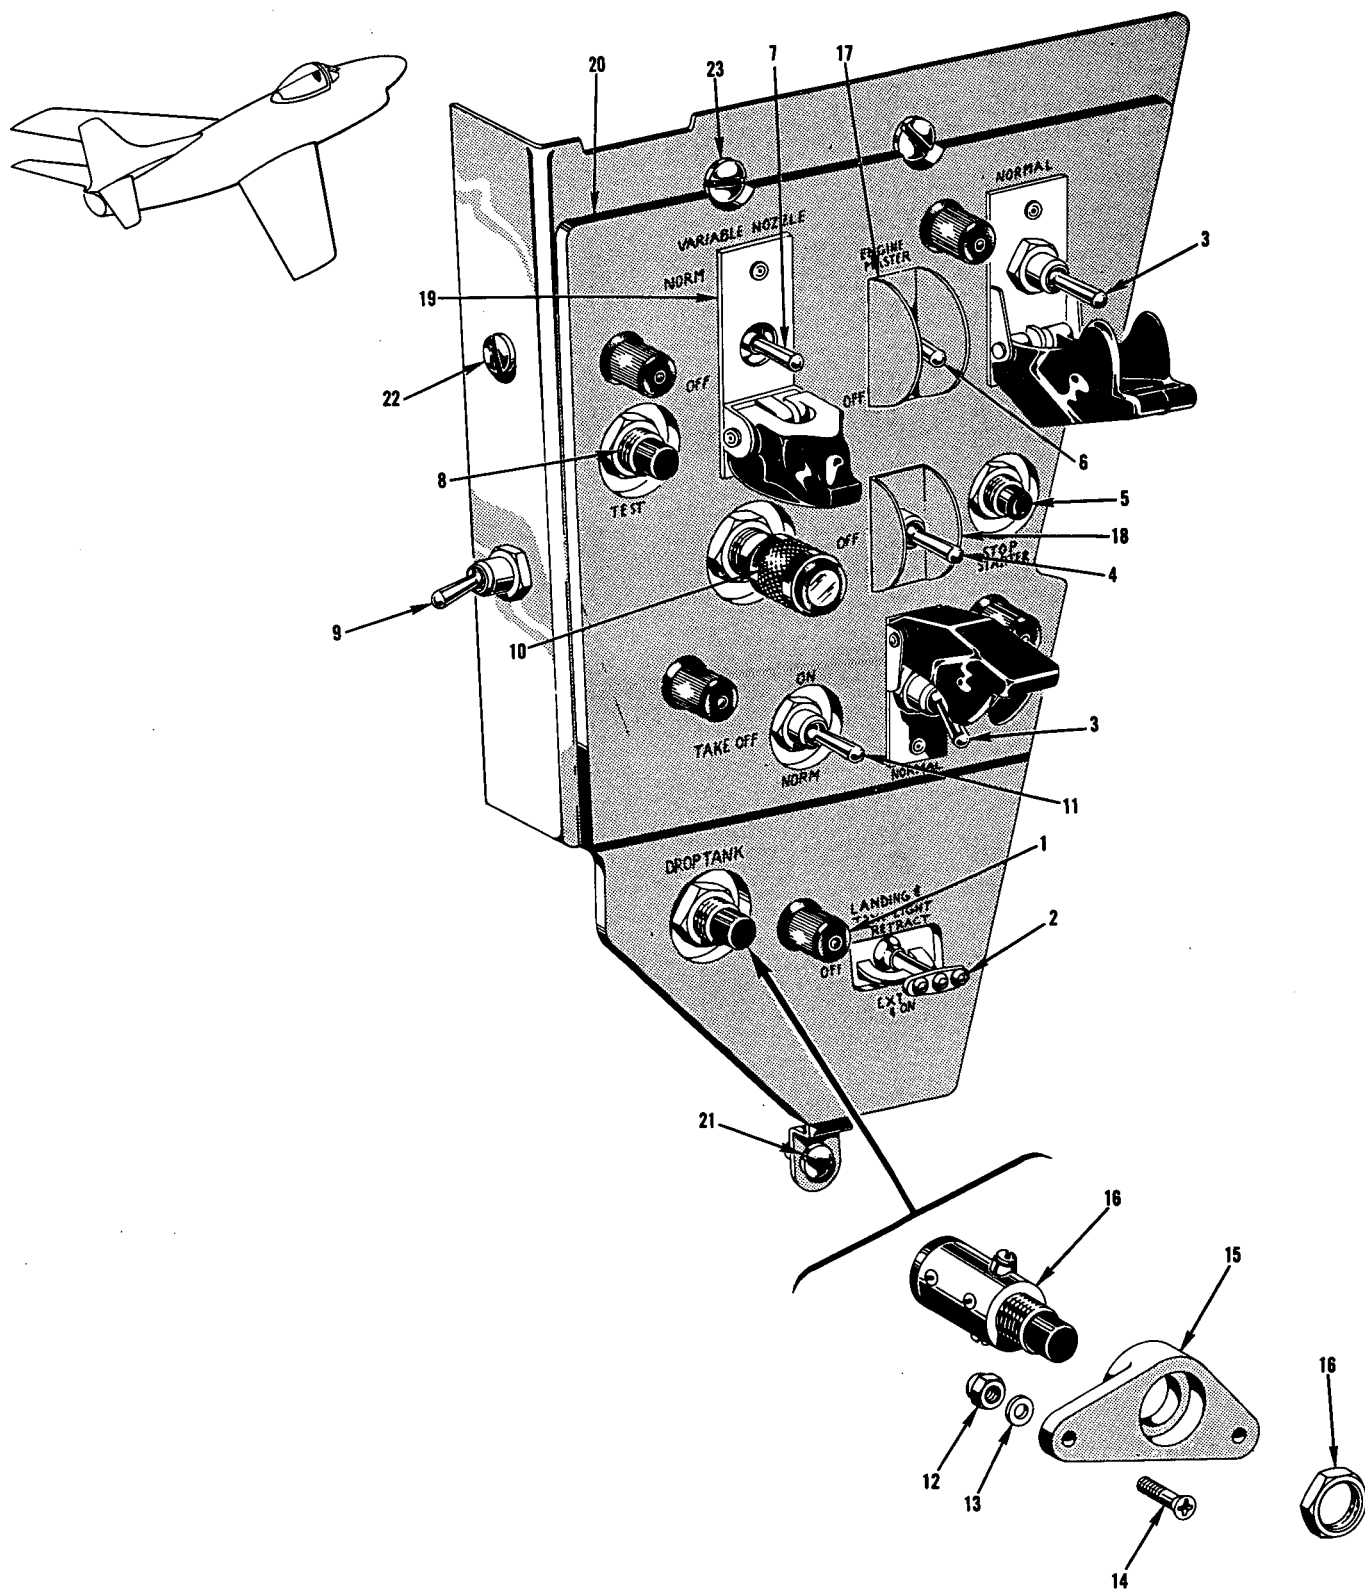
ELECTRICAL LH FORWARD SWITCH COMPLETE PANEL ASSEMBLY
